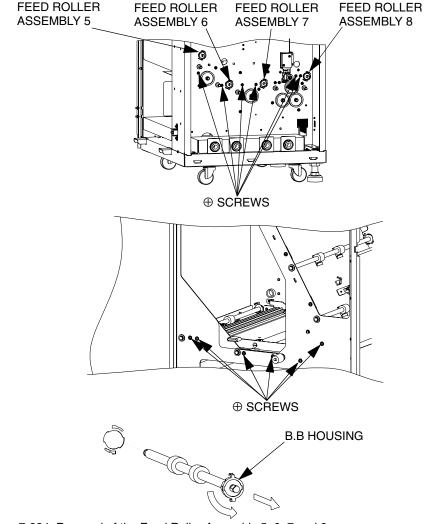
Removal of the Feed Roller Assembly 5, 6, 7 and 8
